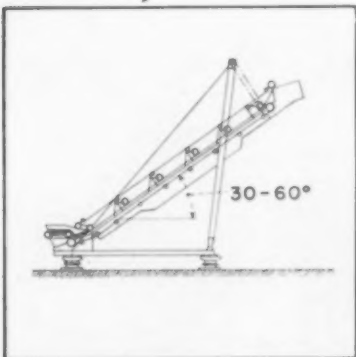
HUGGER BELT over regular belt on elevating conveyor.
